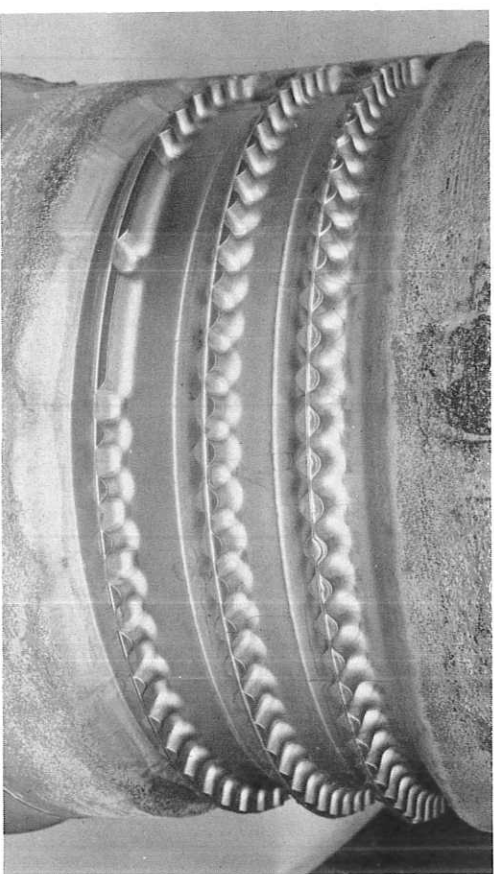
Electrochemically machined section of a 16-in.-dia. titanium aeroengine casing. Three banks of electrodes, each similar to that shown in the frontispiece, produced this excellent standard of surface finish and dimensional control in only 1½ h of machining. (Courtesy of the General Electric Company.)
